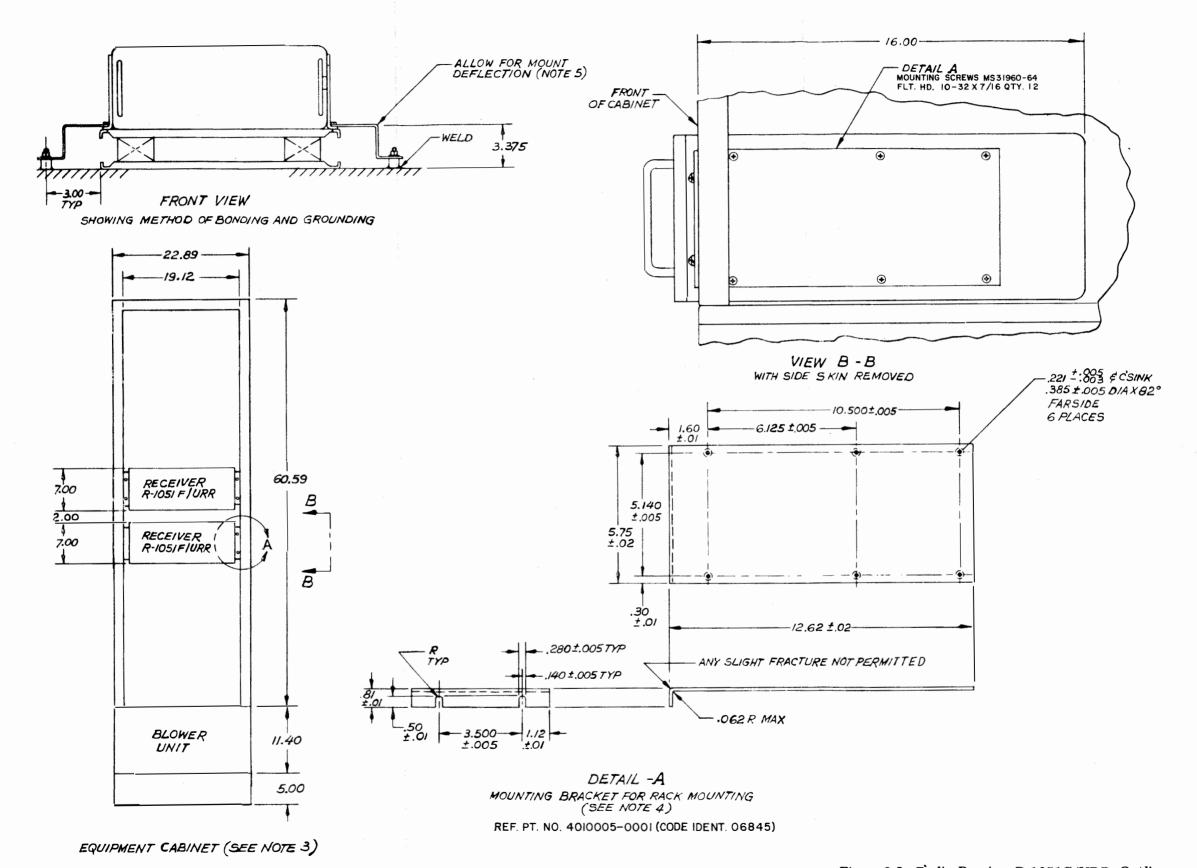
Radio Receiver R-1051G/URR, Outline and Mounting Dimentions (Sheet 2 of 2)
